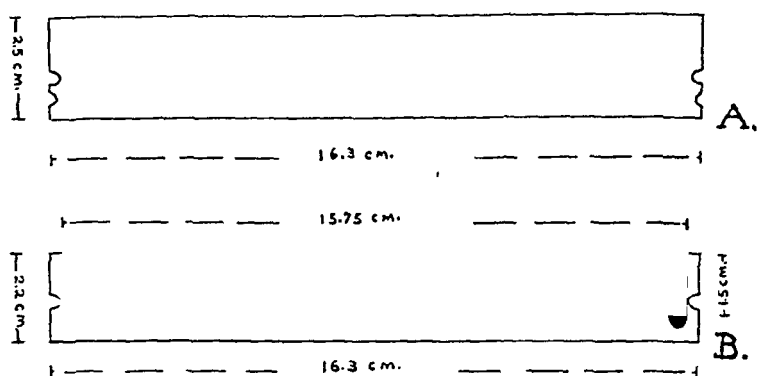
The dimensions of the regular knife (A) and of the blade carrier (B).
